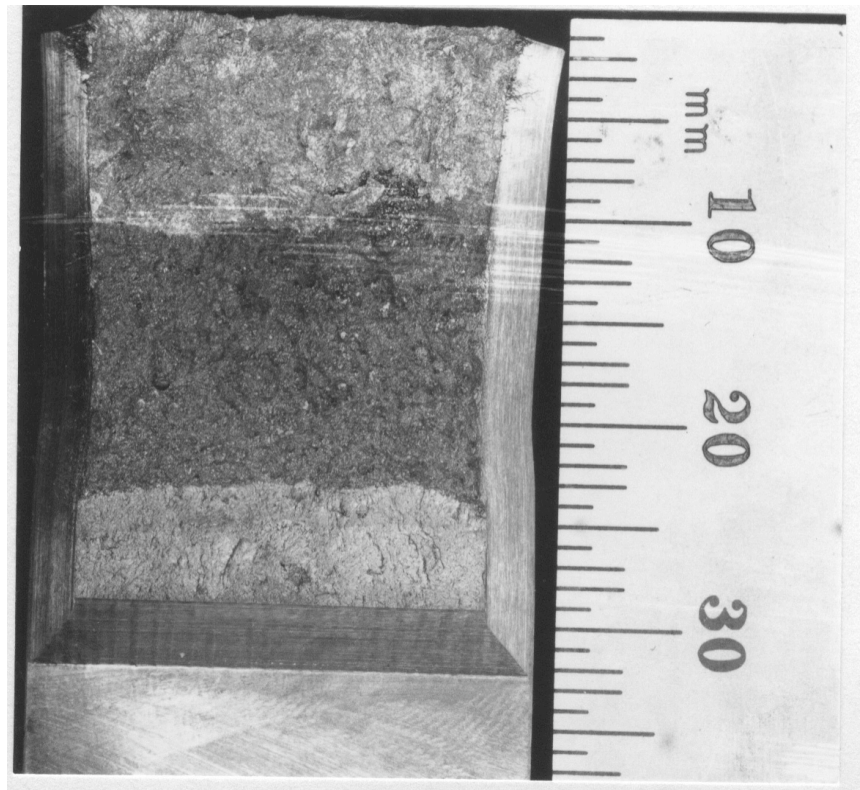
Fracture surface of the spare pump volute VR aged 10,000 h at 400°C and tested at 290°C
